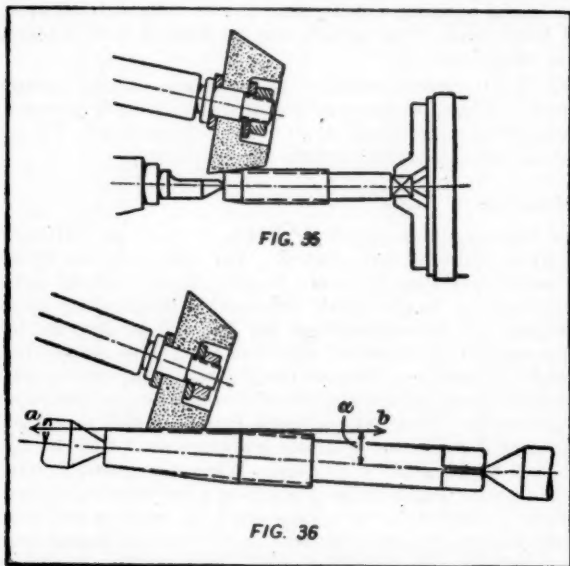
Grinding tap chamfer by the plunge-cut method.
